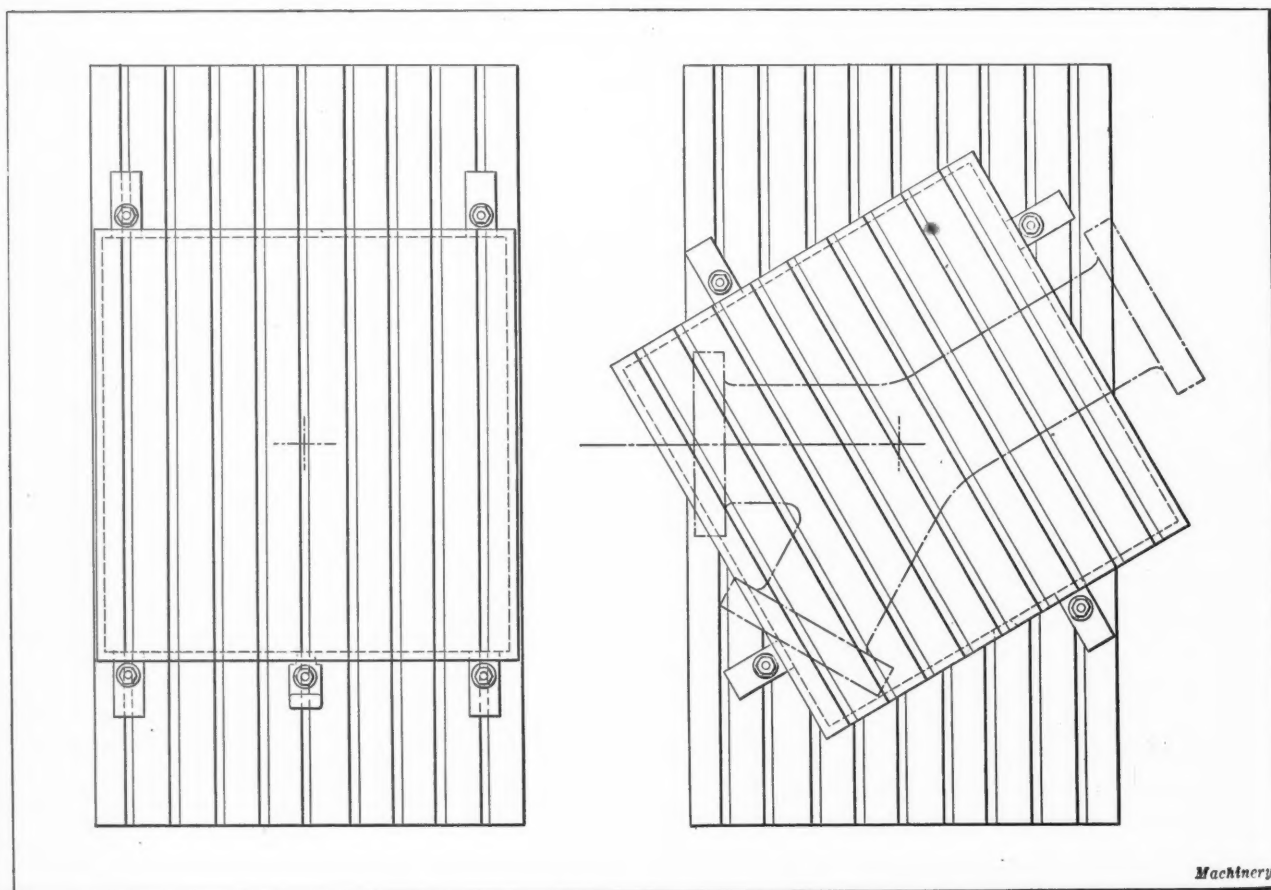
Diagrammatic Views, showing the Positions in which a Quartering Table or Turntable may be employed
